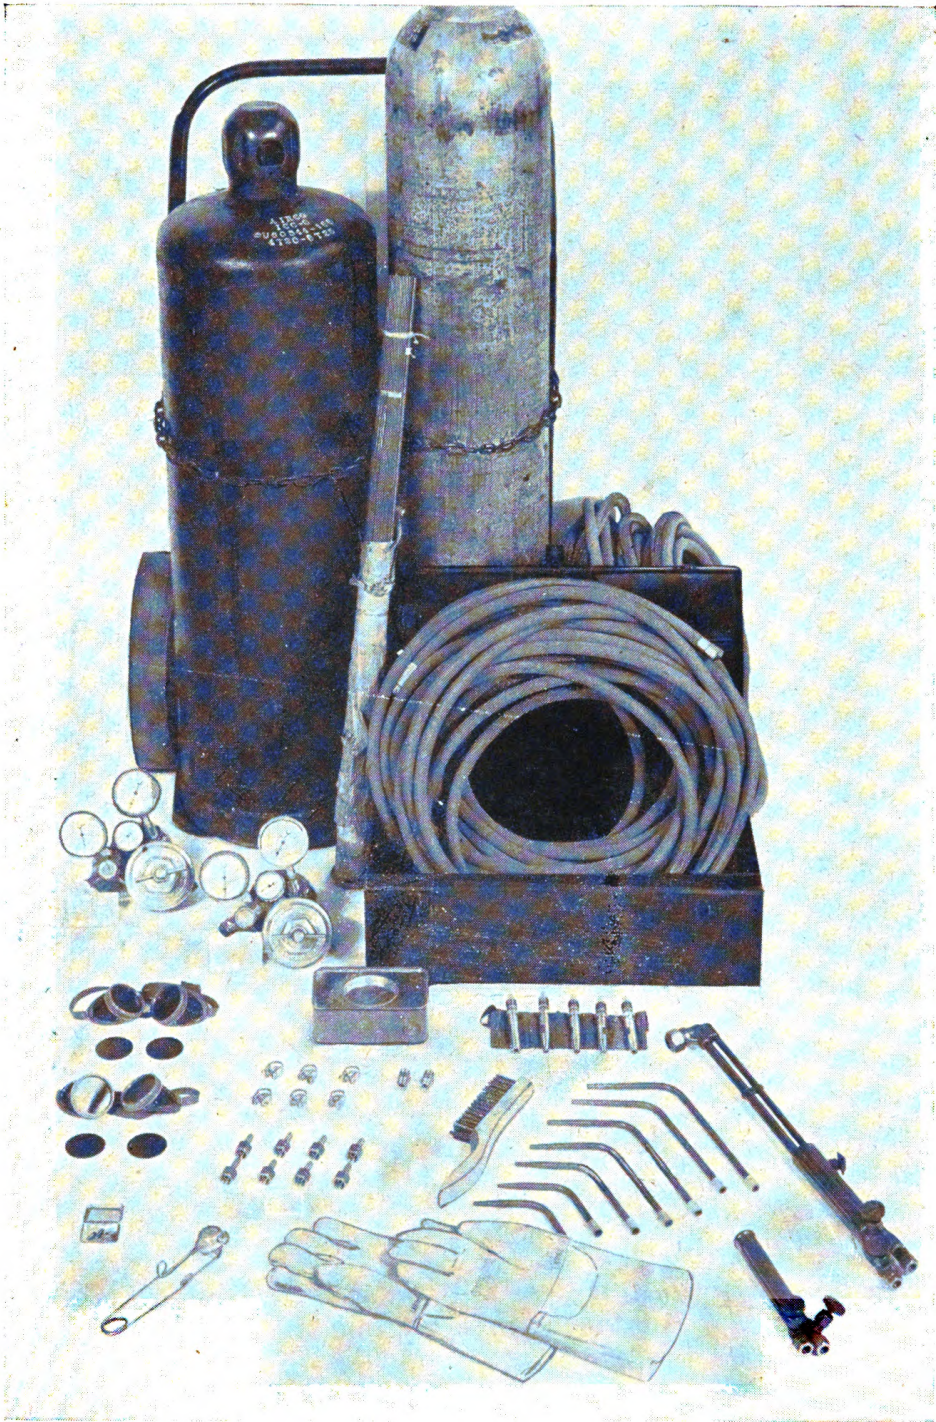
Welding equipment: set No. 2, oxyacetylene.
